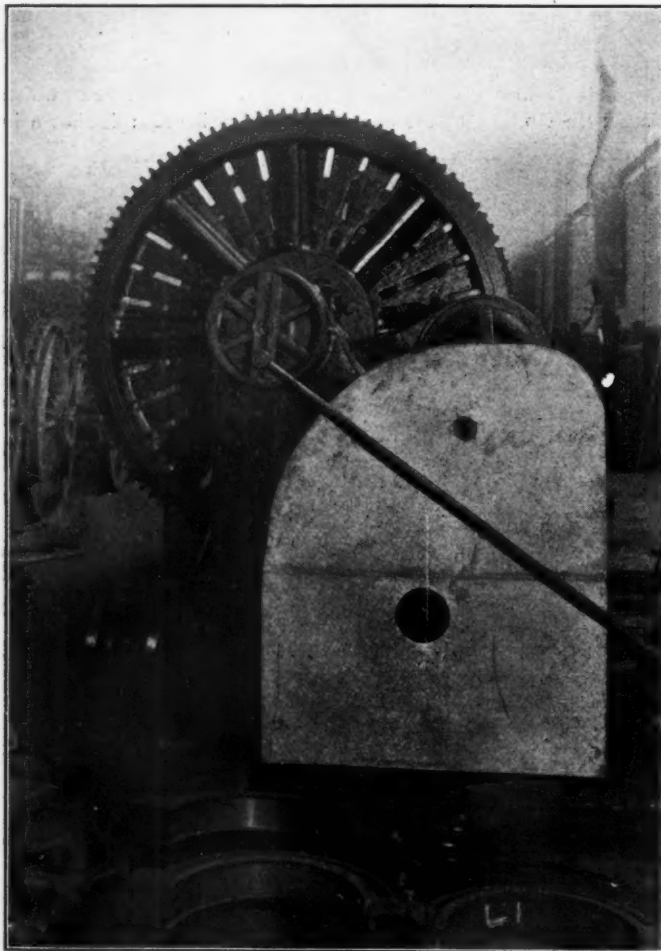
Driving Wheel Lathe Gears Effectively Protected by a Sheet Steel Box.
